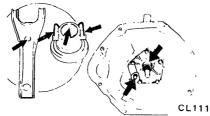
Lubricating points of withdrawal lever and front cover
